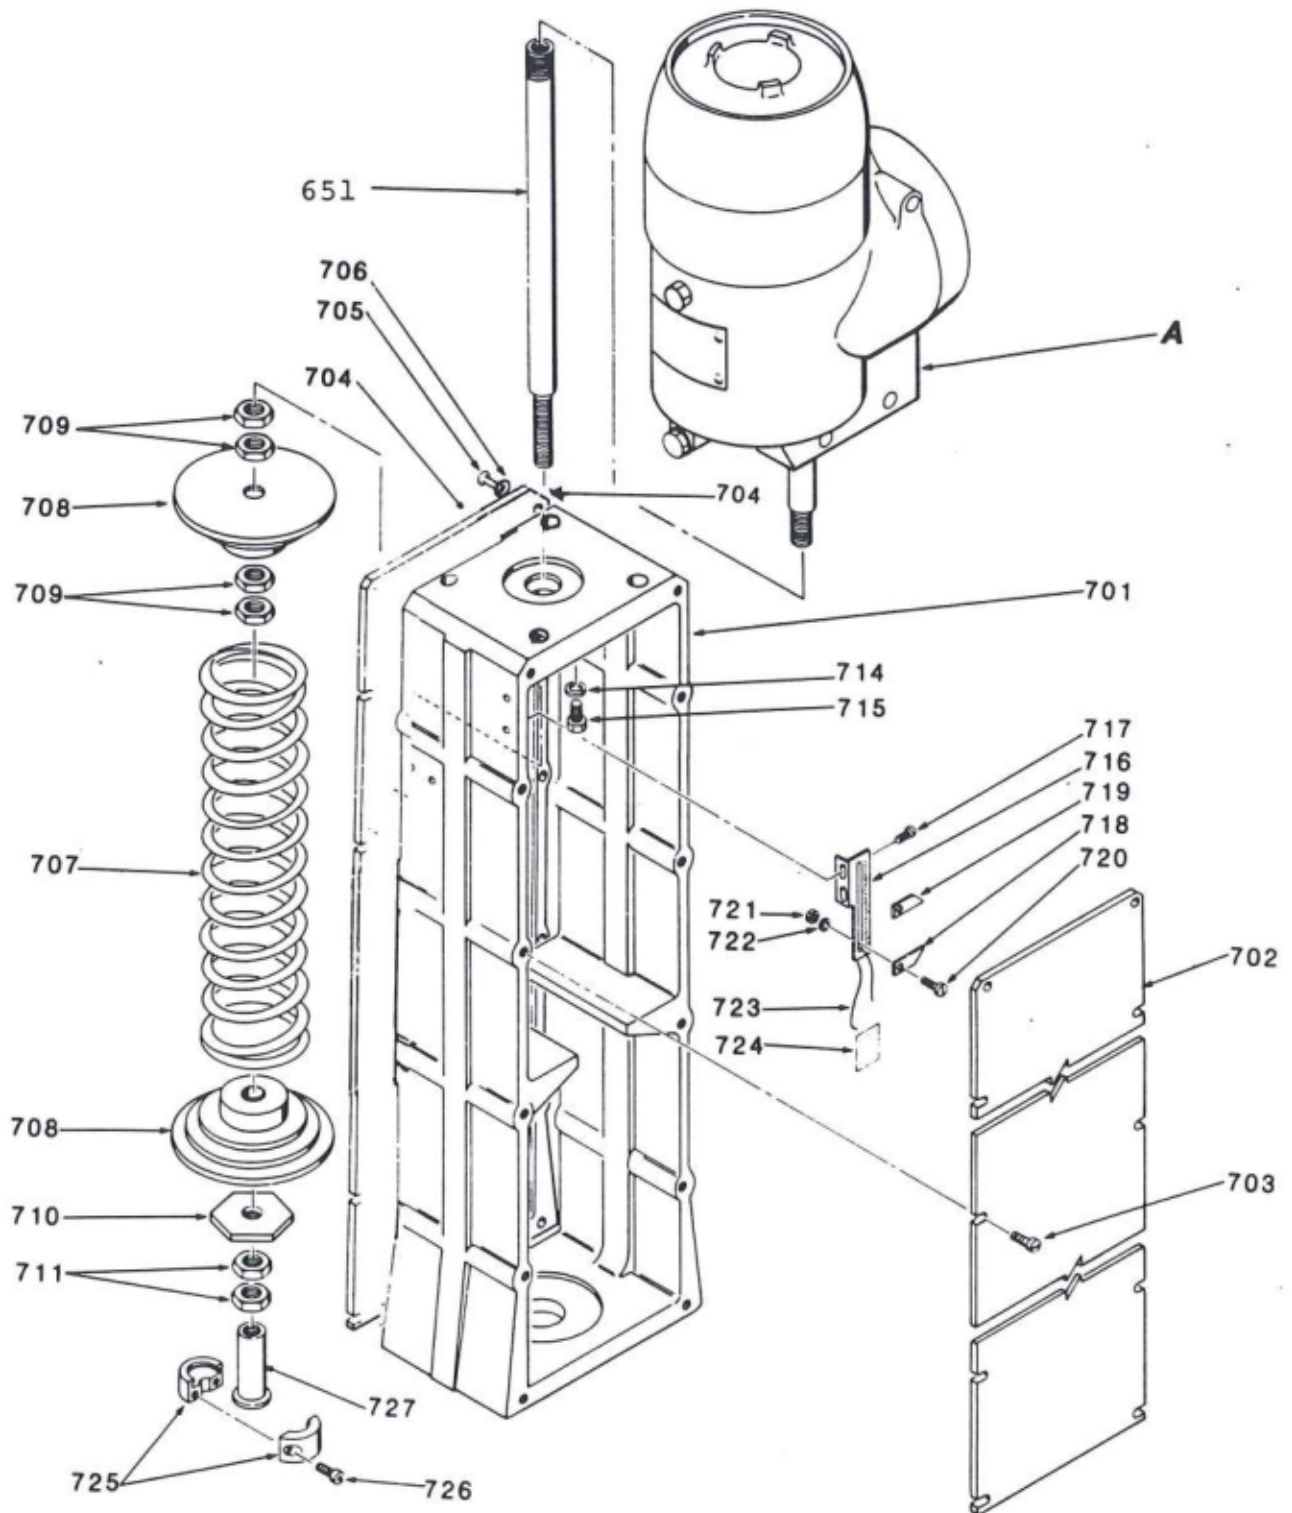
Exploded View for Spring and Yoke, Push Type
